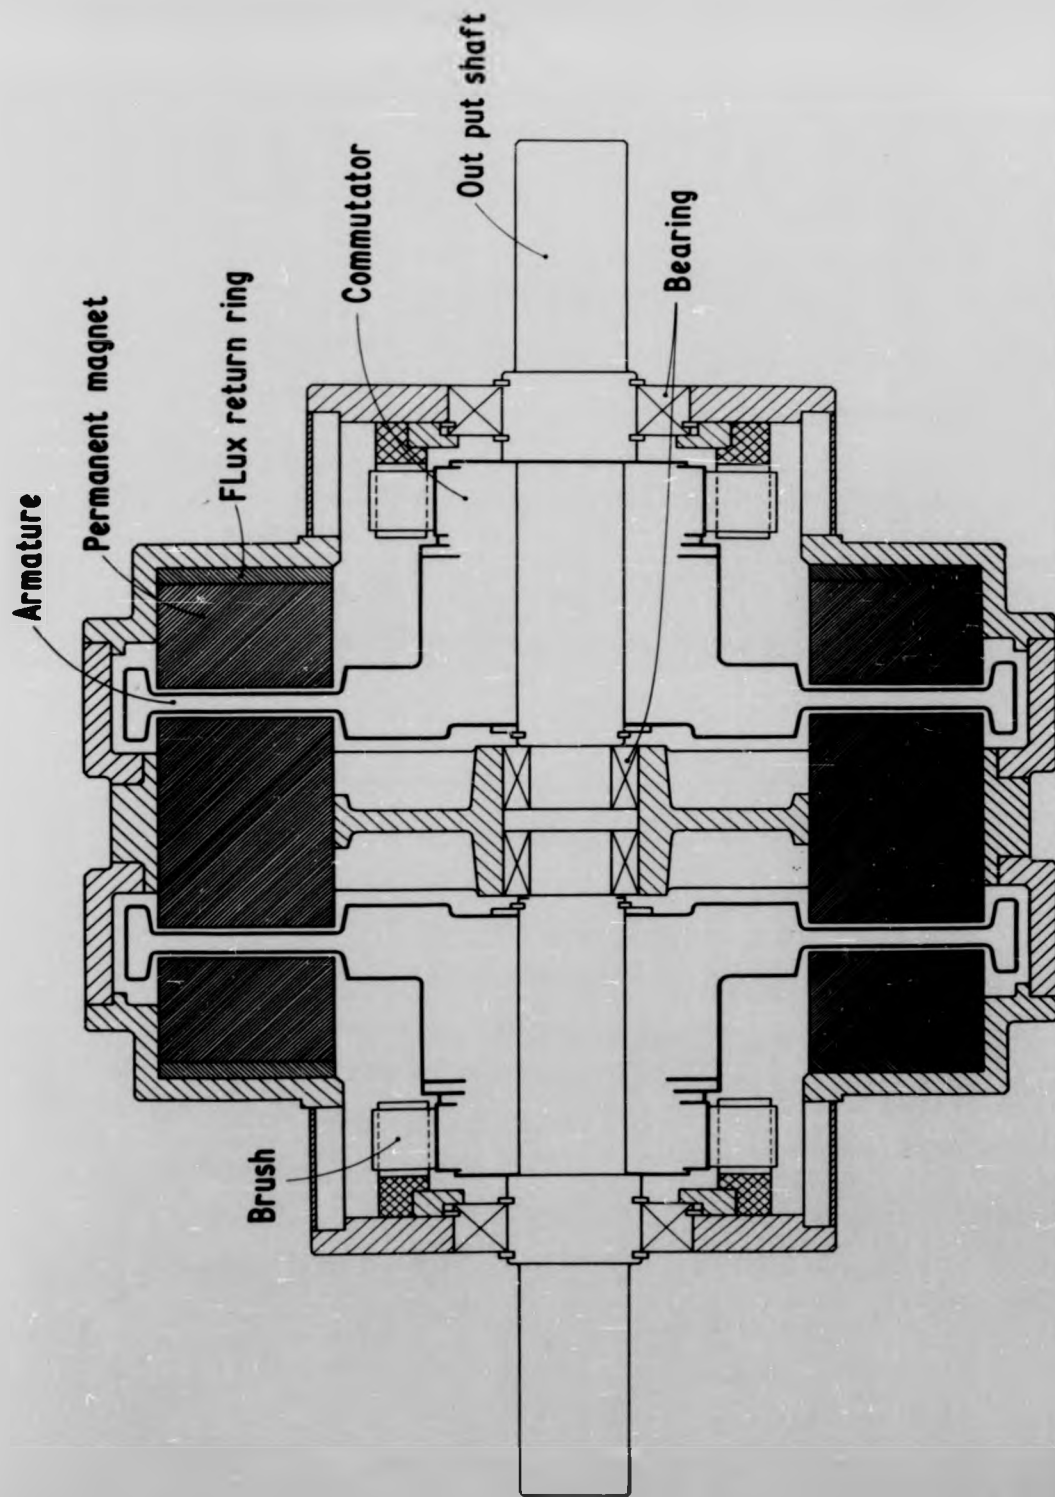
Twin Rotor Disc Motor using Ferroha 111
